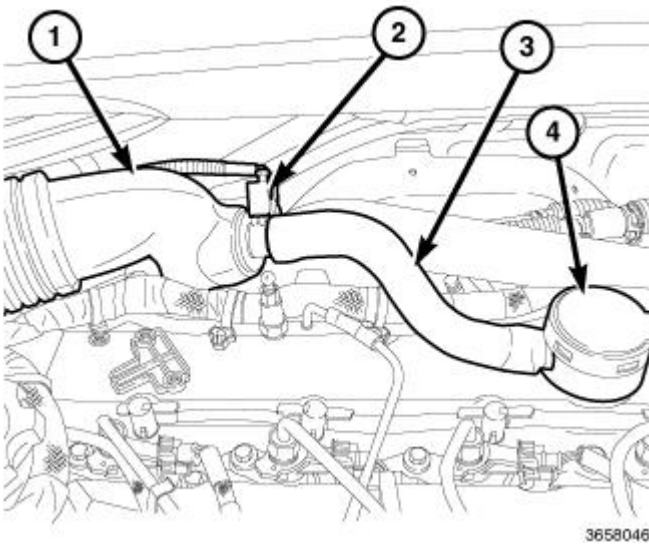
Turbocharger Inlet Tube, Crankcase Vent Hose Heater Wire Harness Connector, Crankcase Vent Hose & Oil Separator
